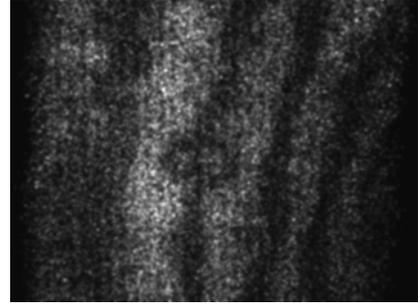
A small pinhole revealed at the surface of the rotor blade skin
